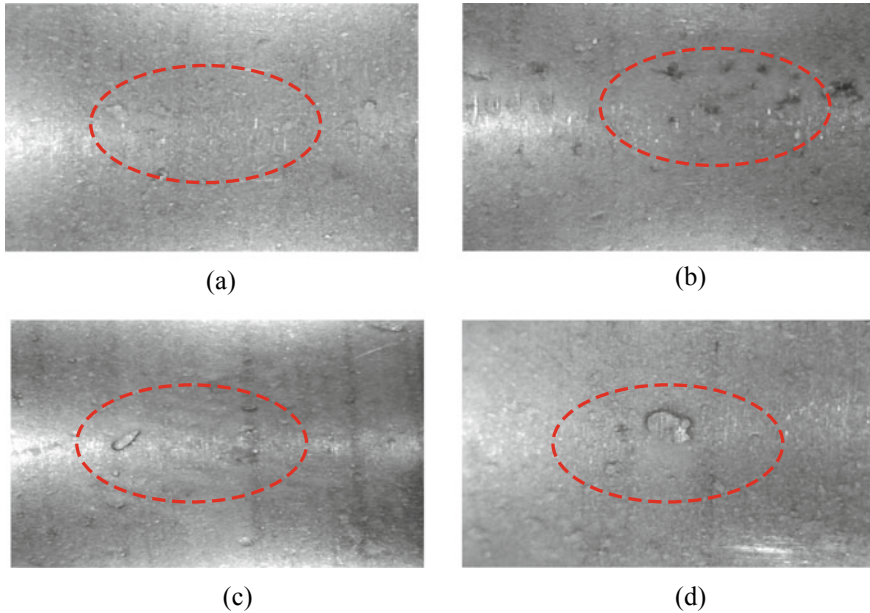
Wear propagation on the inner rolling surface of roller bearing; a after 100 h, b after 300 h, c after 600 h, d after 800 h
